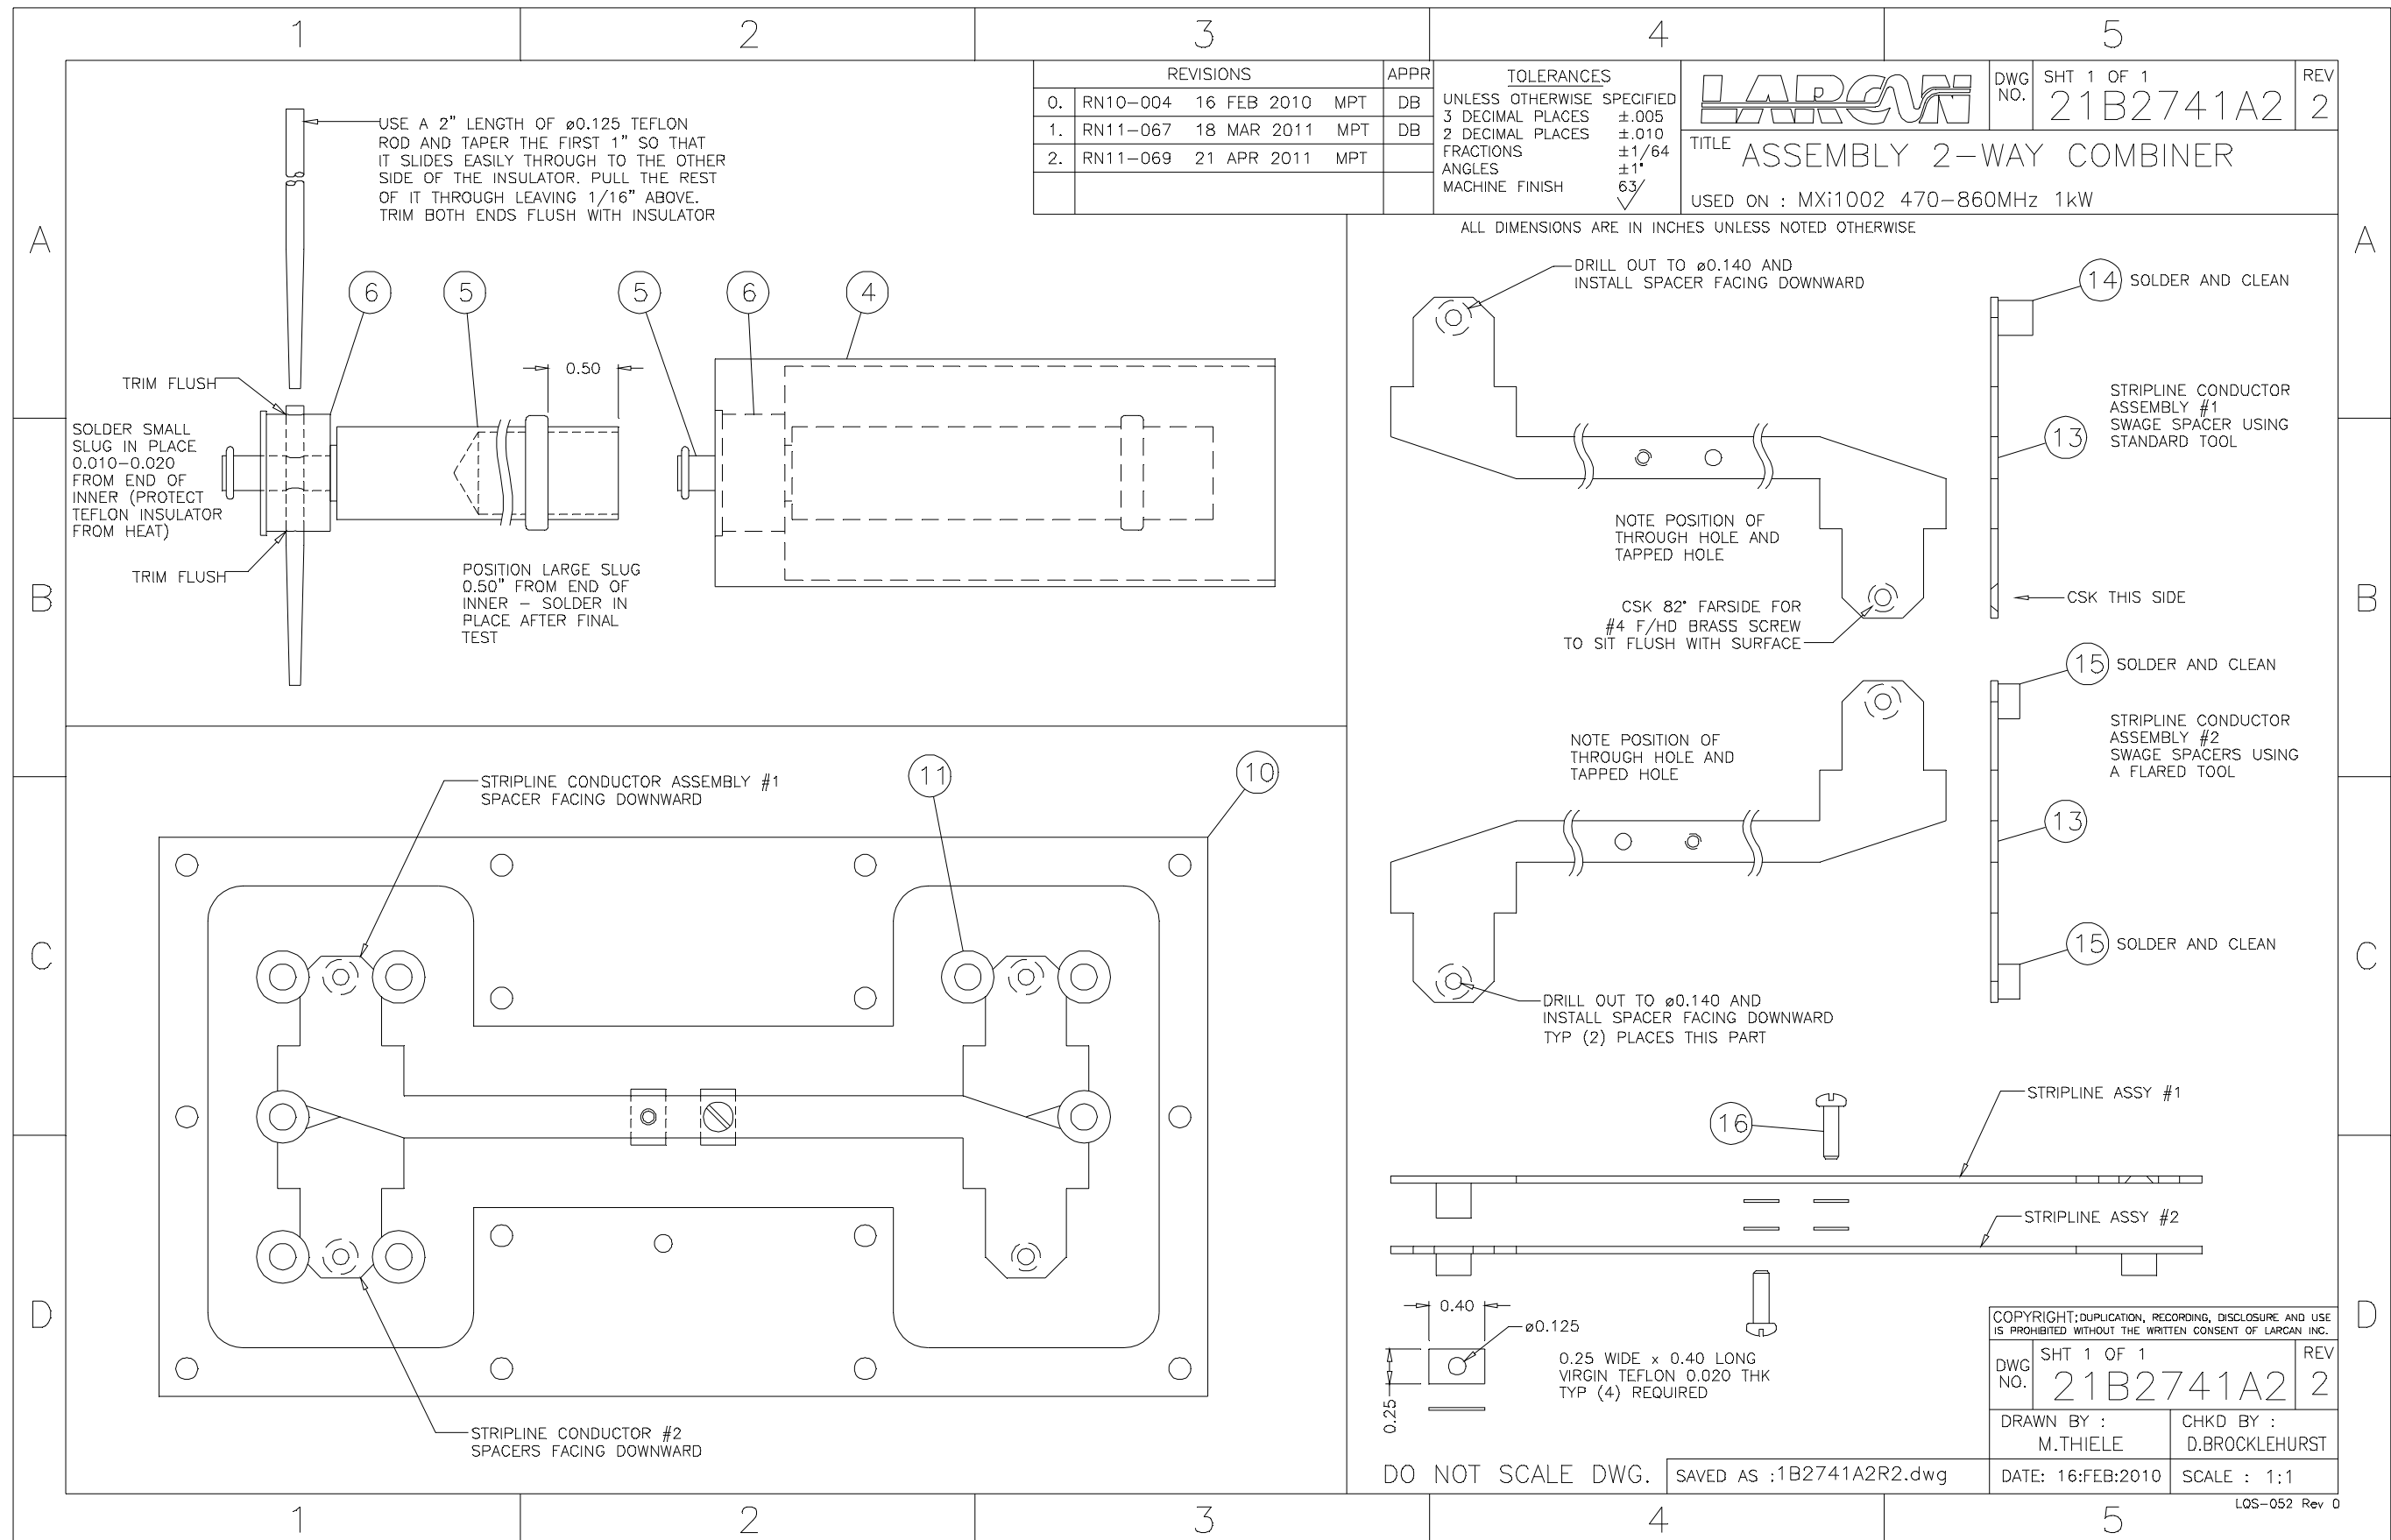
21B2741A2 MXi1002 2-Way Combiner Assembly Sheet 2
